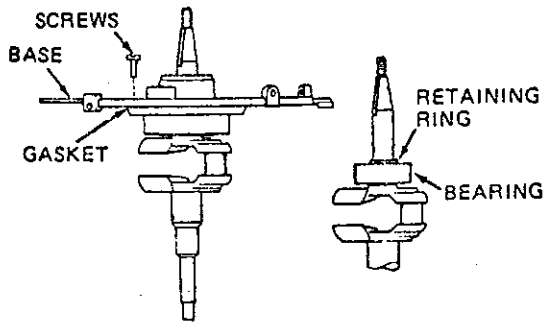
Remove retaining ring and bearing after crankshaft is removed from shroud base of types 642 and 643.
